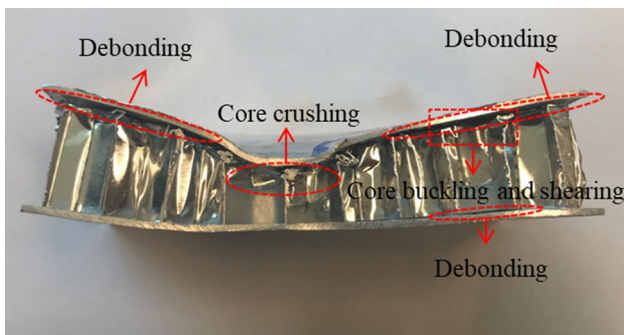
The typical cross section of the impacted specimen with failure mechanisms
